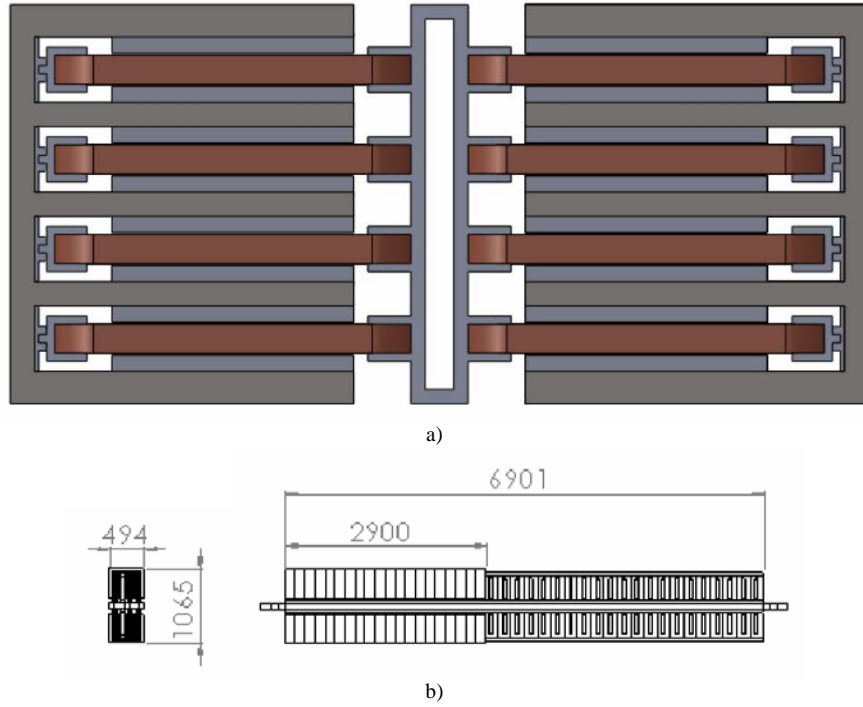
a) Top view: Double sided stacked generator b) 2 MW device dimensions
